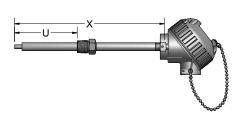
RUGGEDIZED BULLET-NOSED, HARDENED-TOOL STEEL WITH CARBIDE TIP
